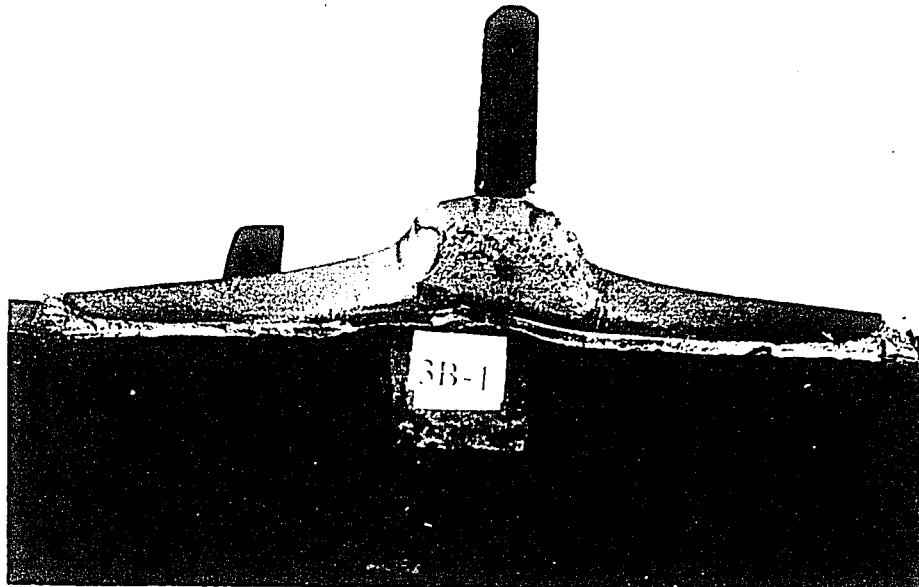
Typical crack surface of crack at toe of transverse leg of the Primary configuration subject to bending
